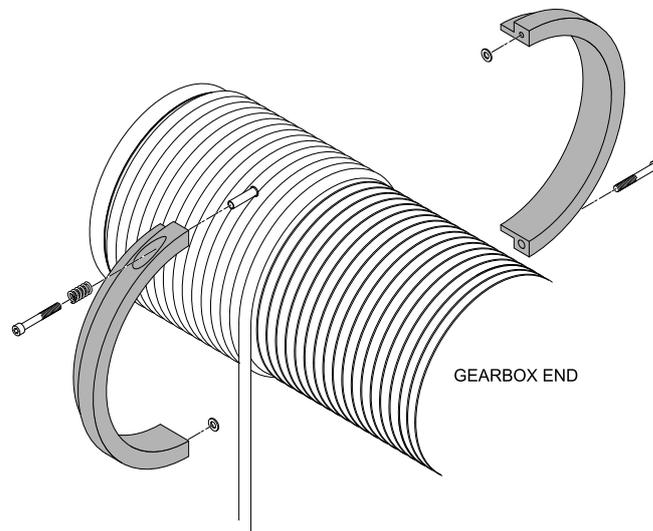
Fitting Top and Bottom Halves of Rope Guide Inner Band
